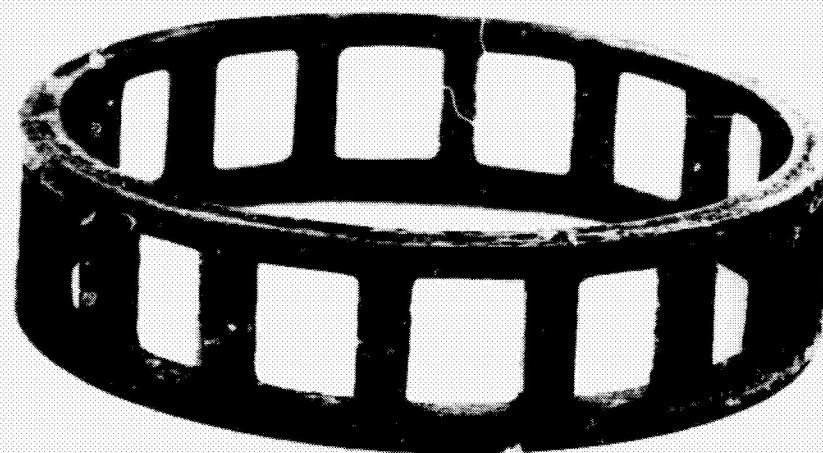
Excellent Appearance of Loader Roller-Bearing Retainer S/N 880009 After More Than 23 hr of Testing, Outside Surface
